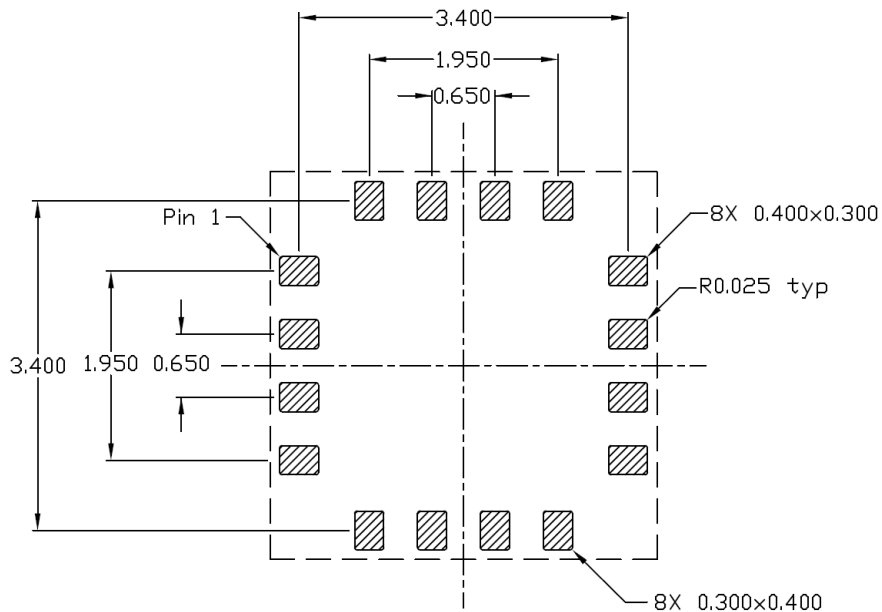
Example of a 16-pin 4 x 4 mm LGA solder stencil layout (Top view)
